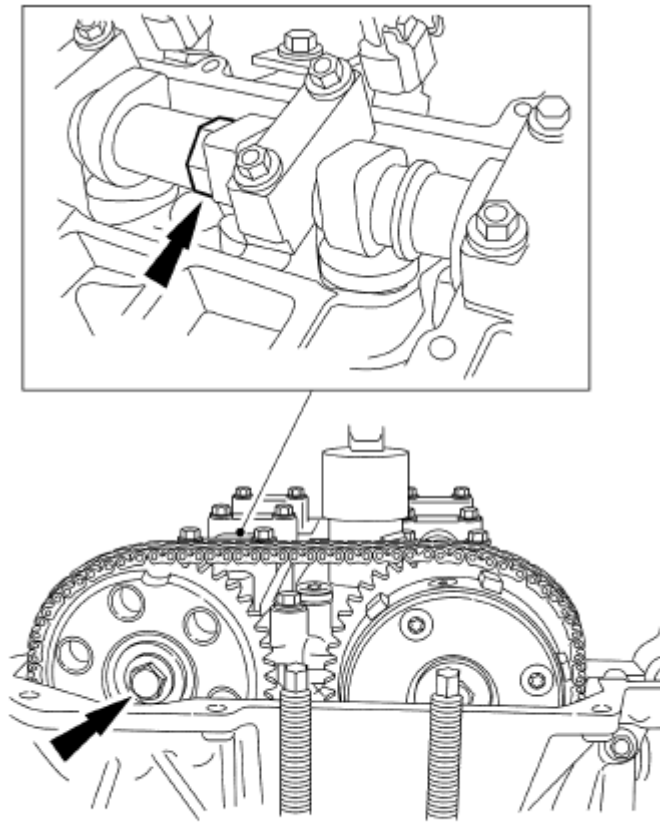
Locating Exhaust Camshaft Drive Gear And Bolt
